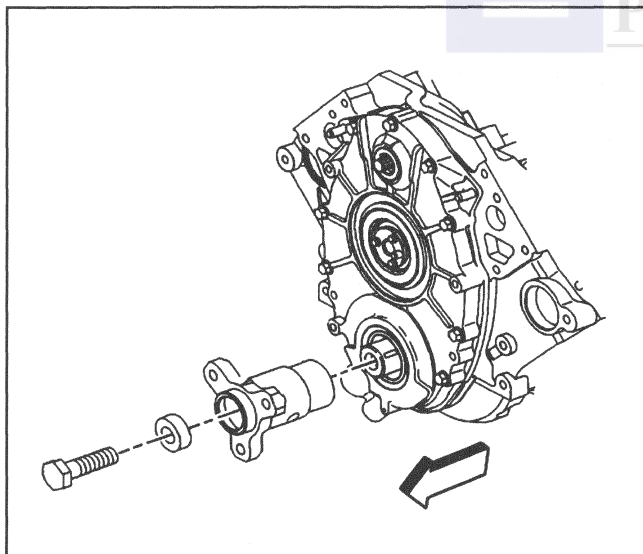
Crankshaft Balancer Hub, Bolt, and Washer
